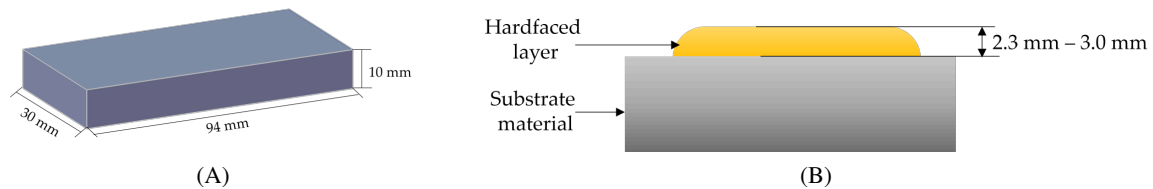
Schematic diagrams showing the dimensions of the prepared samples. (A) Dimensions of the prepared mild steel plate to be used as a substrate material. (B) Cross-section of the final material after deposition of the hardfaced layer onto the substrate material, showing the range of thickness of the hardfaced layers for the various samples
